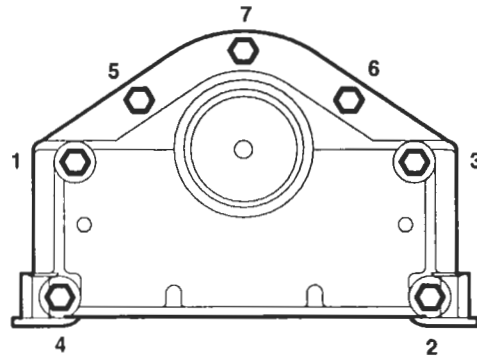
Crankshaft Front Cover Bolt Tightening Sequence
